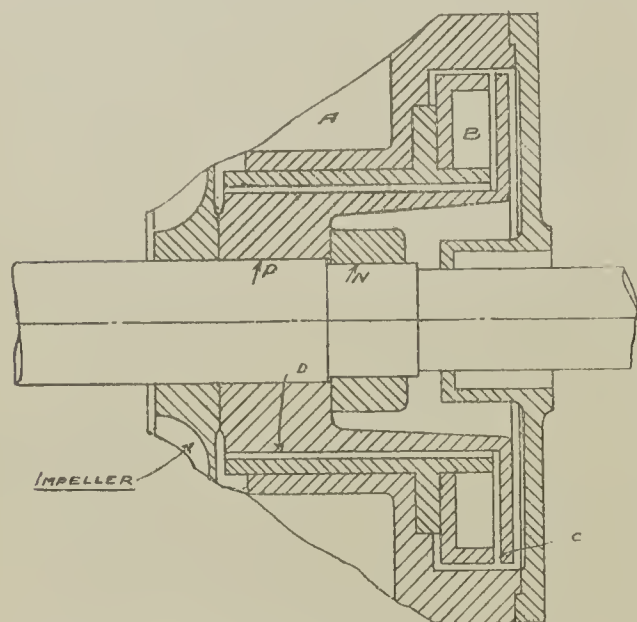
BALANCING PISTON, SULZER PUMP.
